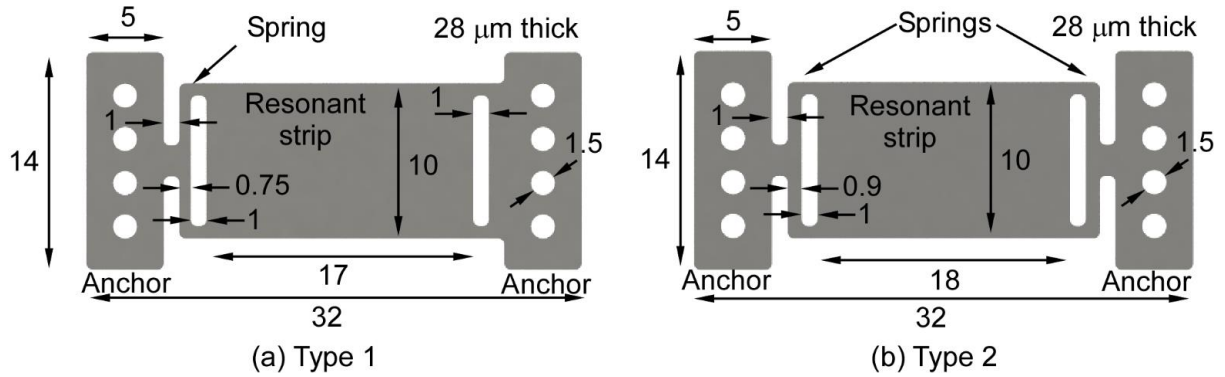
Dimensions of the two prototype sensor designs (in mm).
